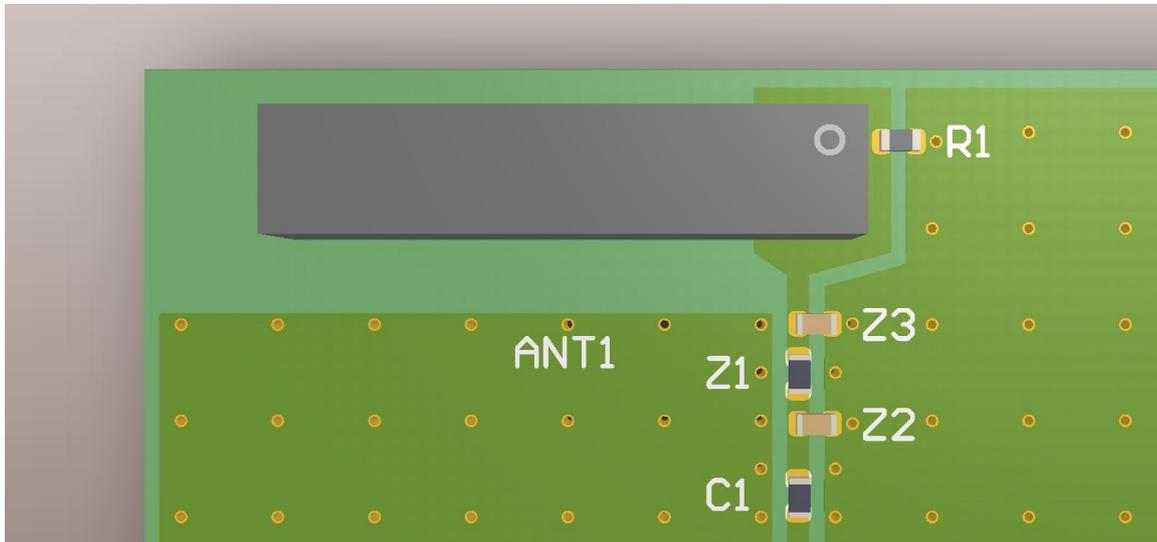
Antenna placed near corner of PCB. PCB edge cutting into keep-out zone on the left is acceptable.
